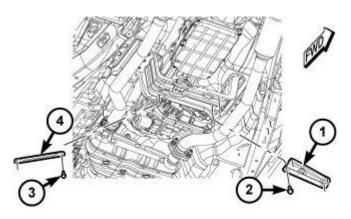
Left & Right Crossmember Brace With Fasteners Courtesy of CHRYSLER GROUP, LLC
